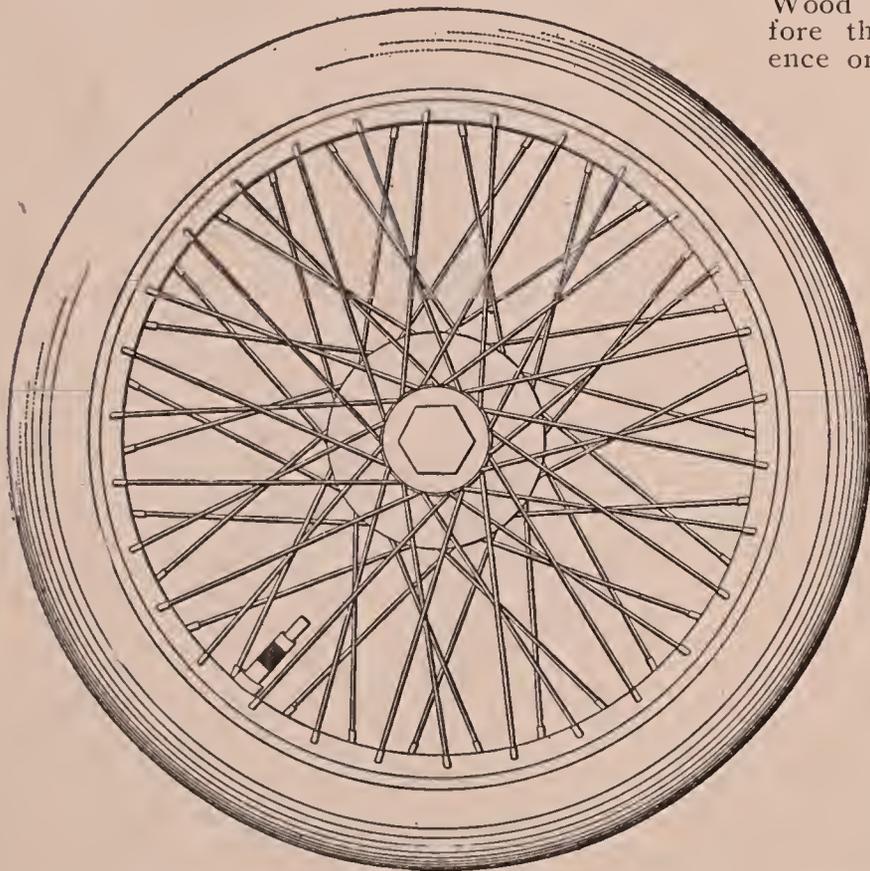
A General View of a Wire Wheel, Showing How the Spokes Radiate from the Inner, Outer, and Center Portions of the Hub and Flange.
